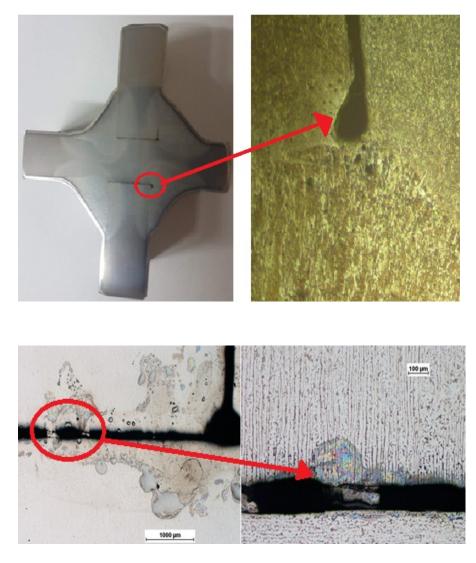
Crack initiation in the welding area specimen No. 10 at weld root.
